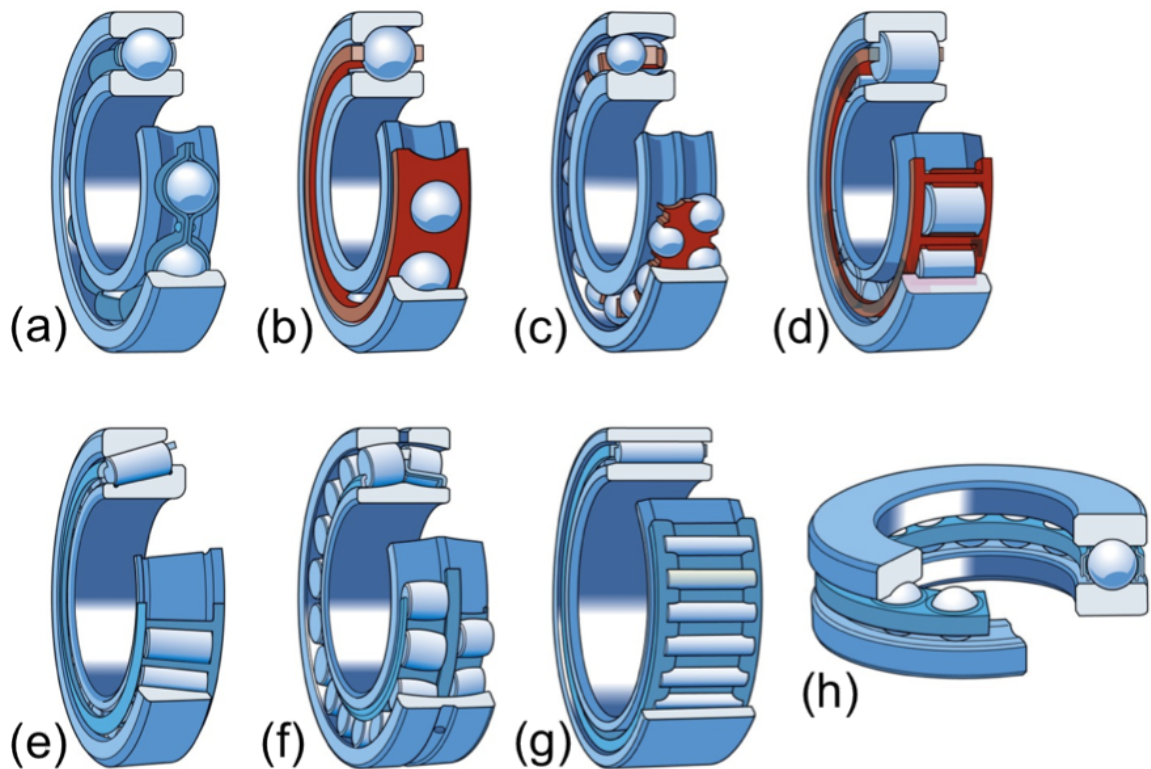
Bearing configurations [30]: a) deep groove ball bearing, b) angular contact ball bearing, c) self-aligning ball bearing, d) cylindrical roller bearing, e) tapered roller bearing, f) spherical roller bearing, g) needle roller bearing, h) thrust ball bearing.
